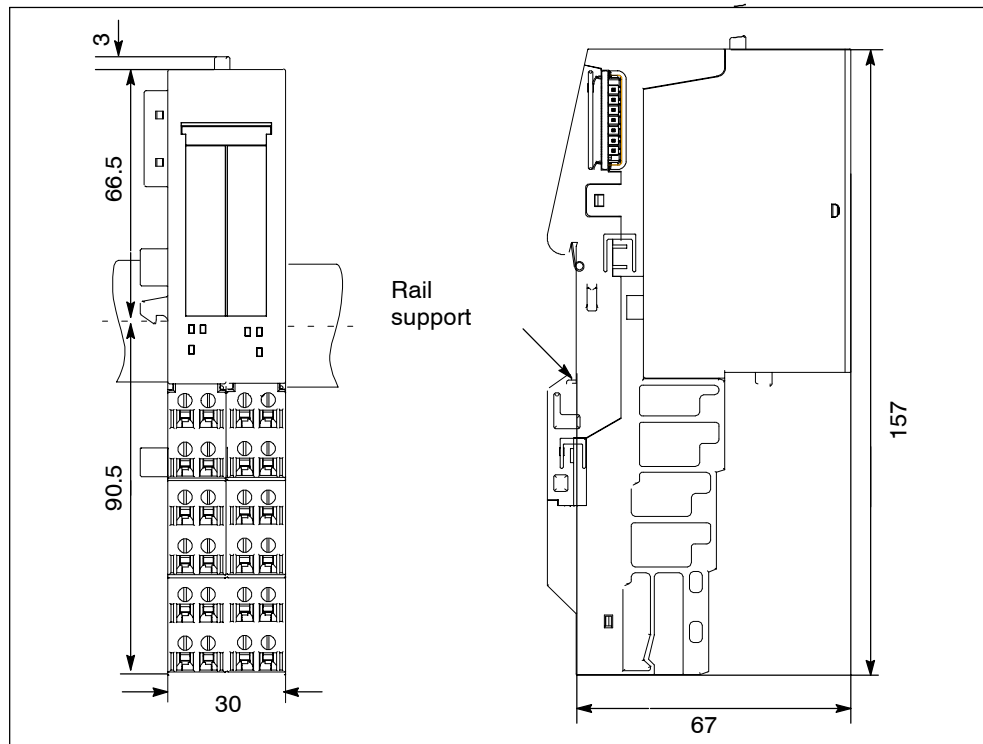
Dimension drawing for terminal modules (screw-type/spring terminals) with an electronic module inserted
